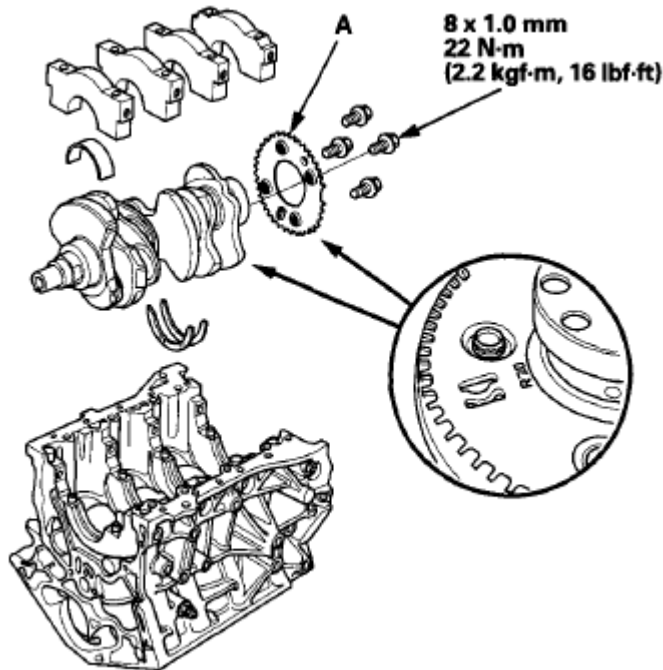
Removing CKP Pulse Plate From Crankshaft With Torque Specifications
